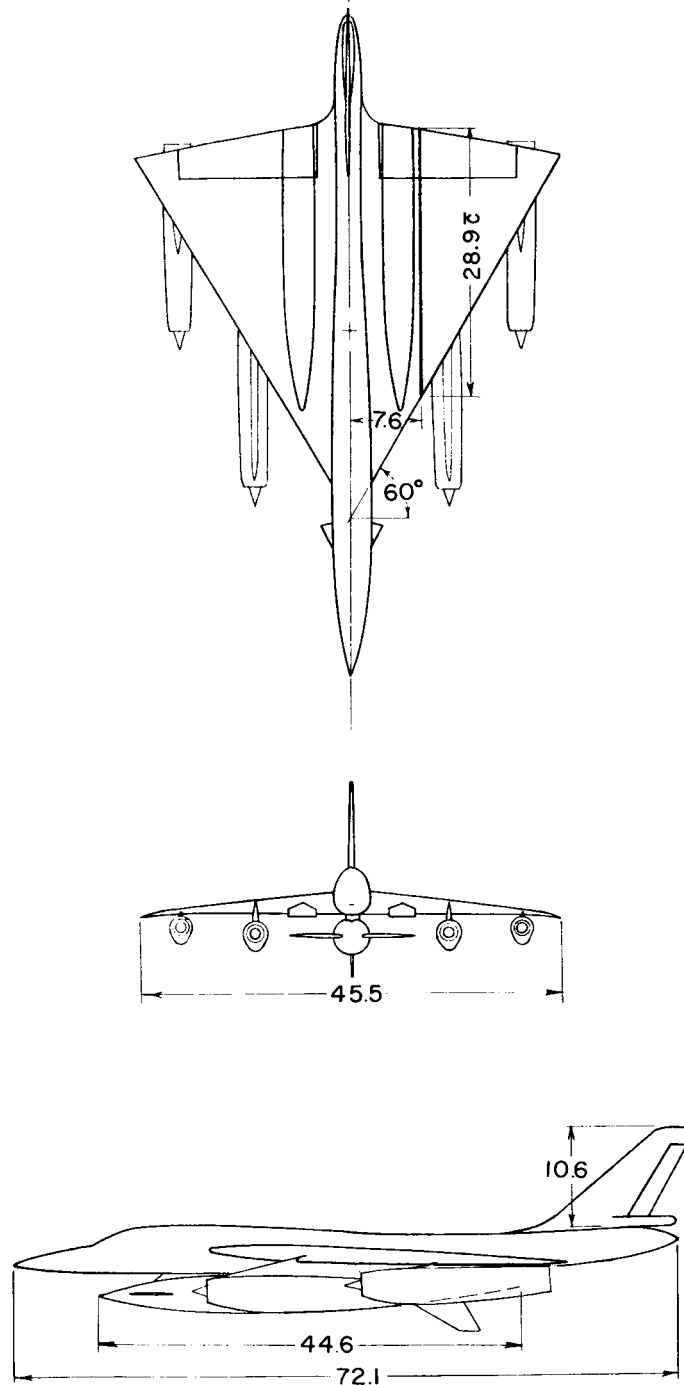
Three-view drawing of model of 60° delta-wing bomber used in investigation. All dimensions are in inches.
